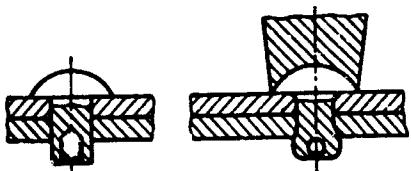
Diagram of the process of connection of parts with explosive rivets.
